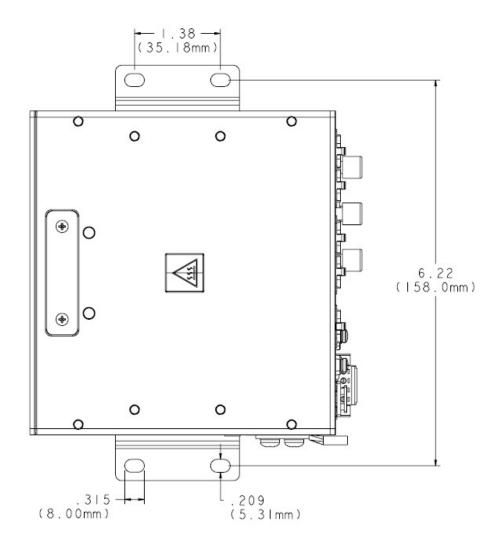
Wall/Floor mounting hole dimensions with mounting brackets attached
